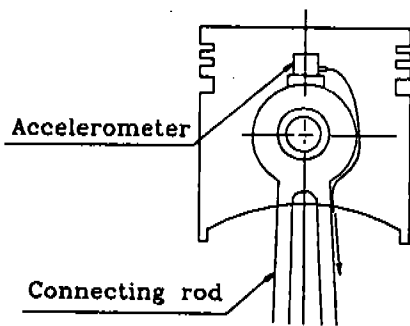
(b) The accelerometer and the cable installed at the connecting rod
